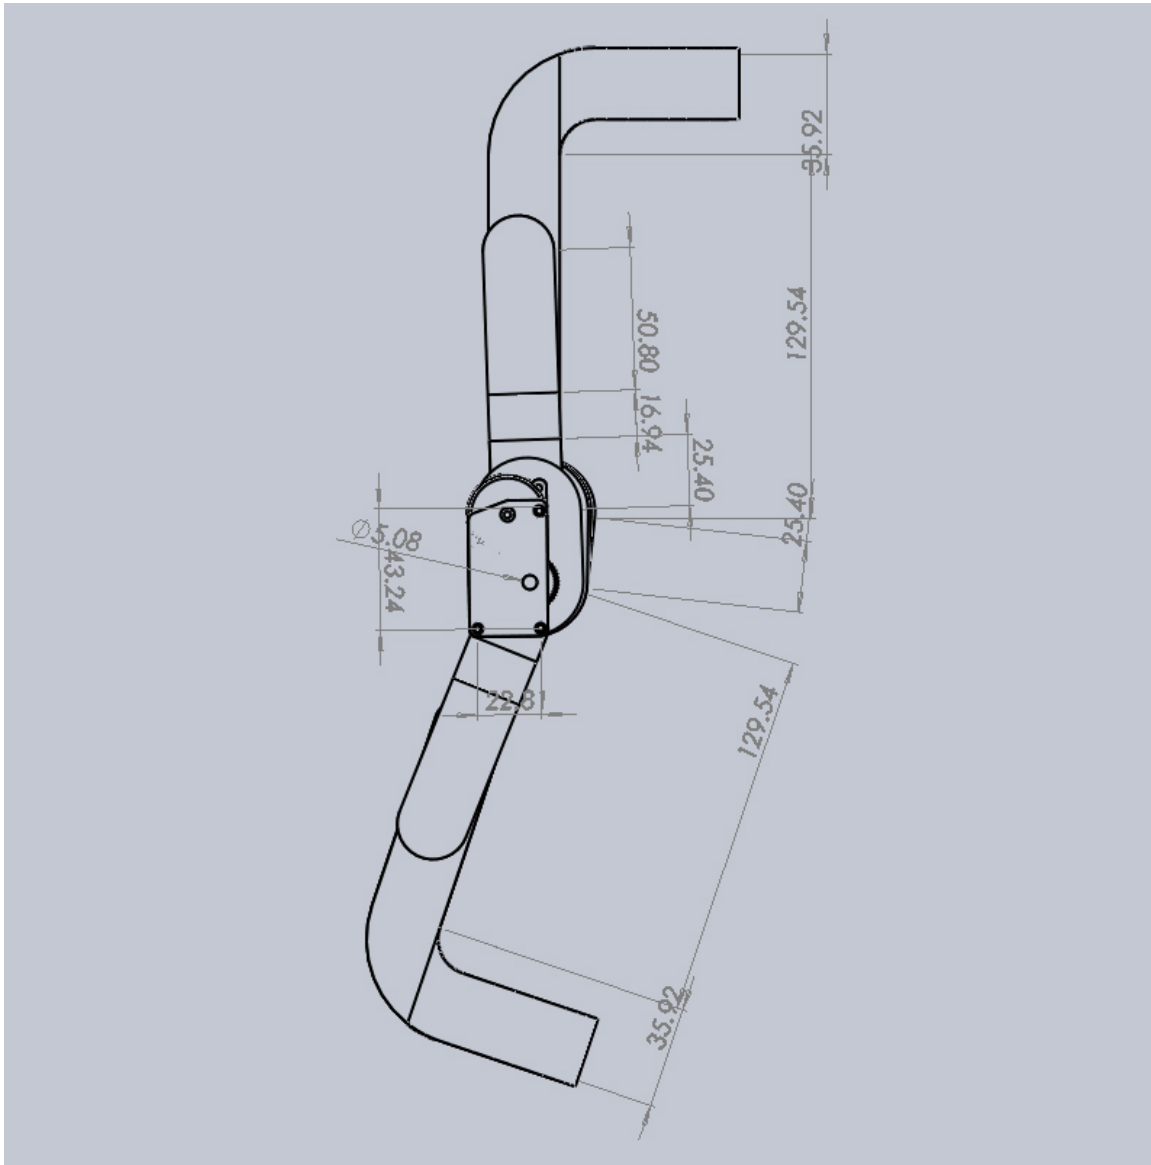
SolidWorks Solid Model Left View of the Knee Brace Assembly
